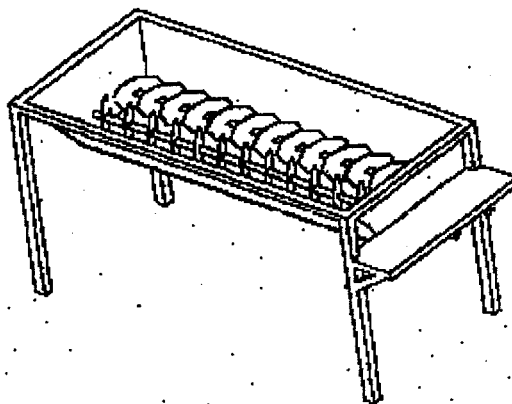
Auto Cad Drawing Of The Feed Hopper.
